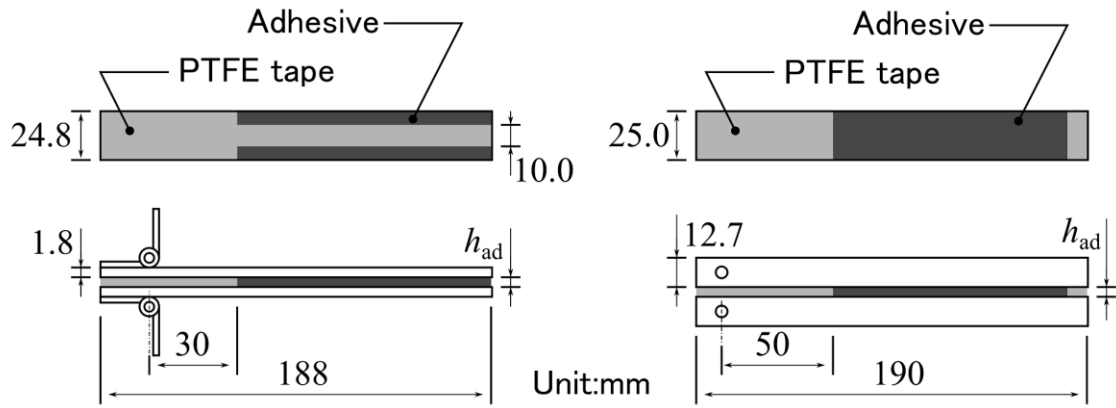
Configuration and dimensions of thin- and thick-substrate DCB specimens. Above: Image of the adhesive layer (top view). Bottom: Image of the test specimen after bonded (side view).
